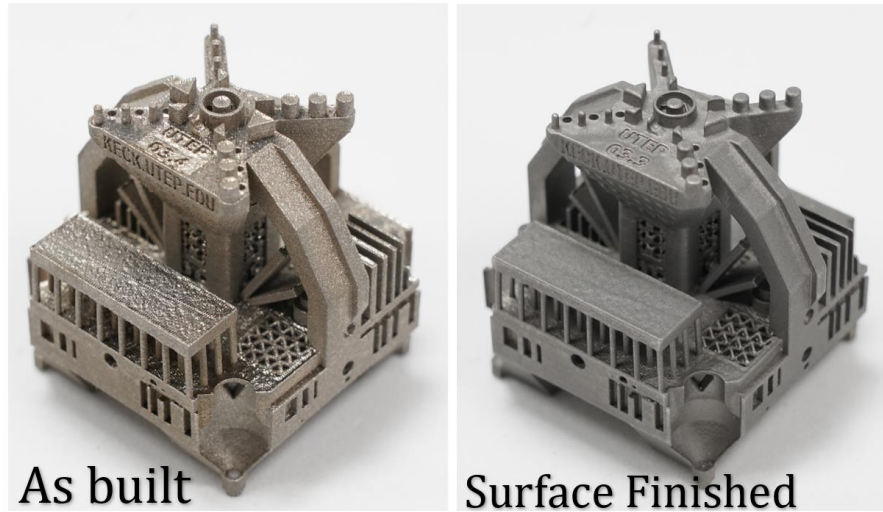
As-built surface roughness and surface-finished by abrasive slurry machining.
